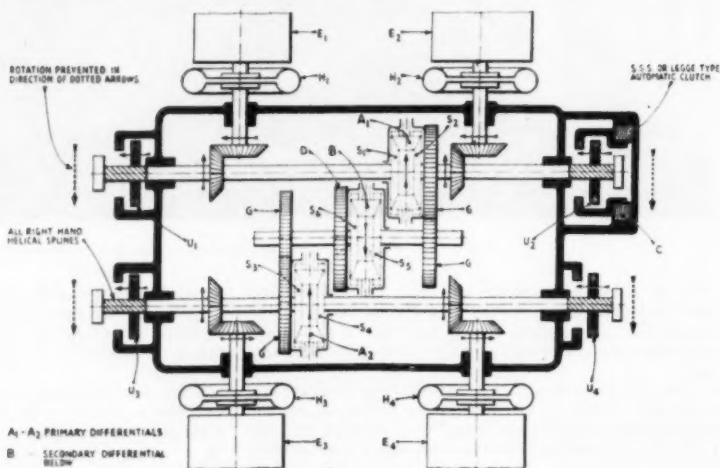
FOUR-ENGINE 2000-HP DIESEL LOCOMOTIVE EMPLOYING HYDRAULIC DRIVE
